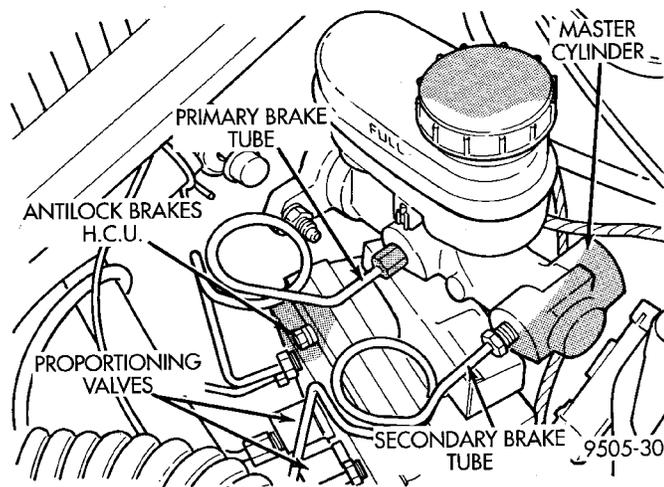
ABS Master Cylinder Primary And Secondary Ports
